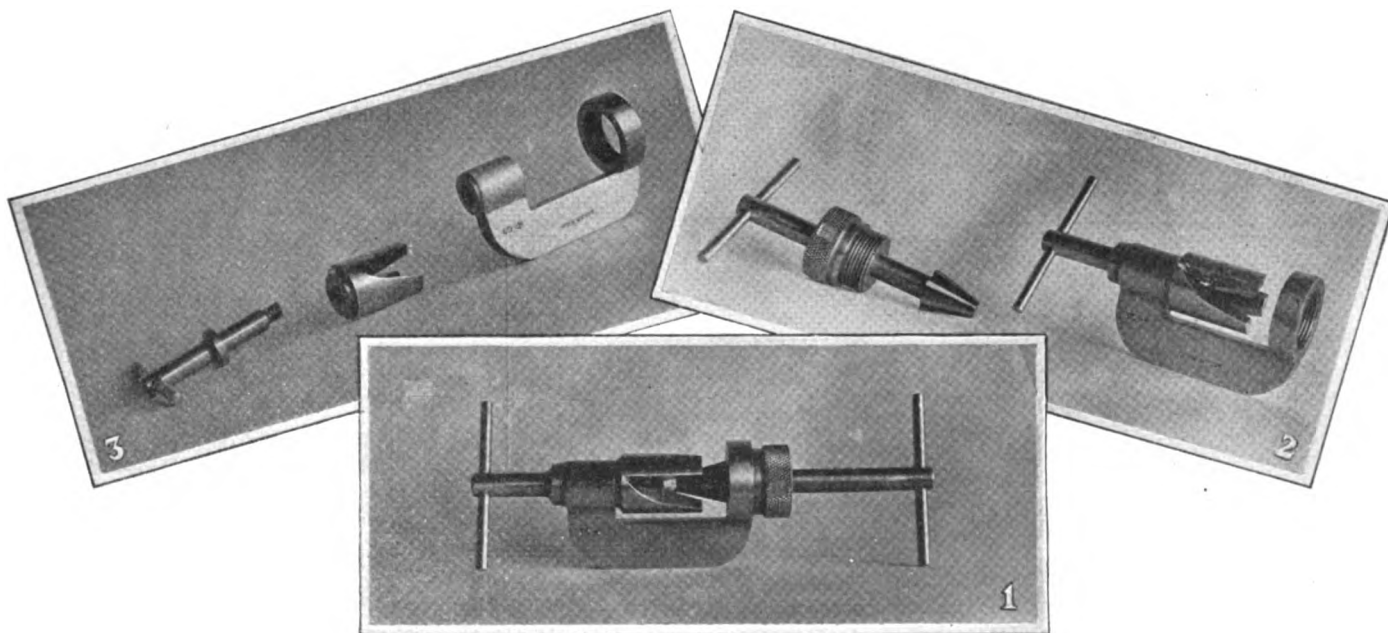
Reseating tool completely assembled; Fig. 2—Seat reamer removed from the frame; Fig. 3—Tool completely disassembled
